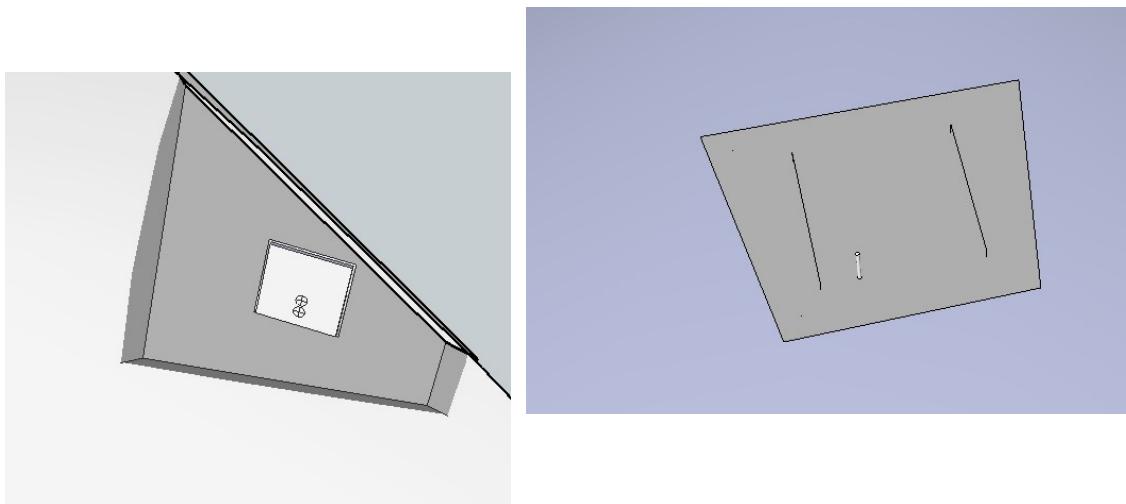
(above-left): Side-bottom view of 3D model of Design 3, placed in context
